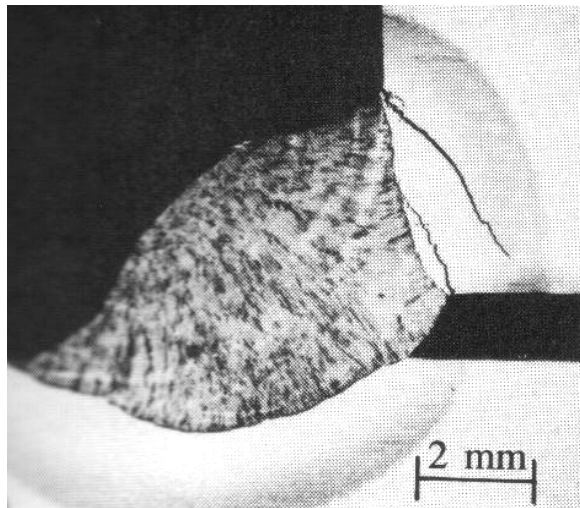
4 A typical HAZ cracks initiating in weld root as well in weld toe caused by an excessive root gap (after Bailey et al. 1995).
